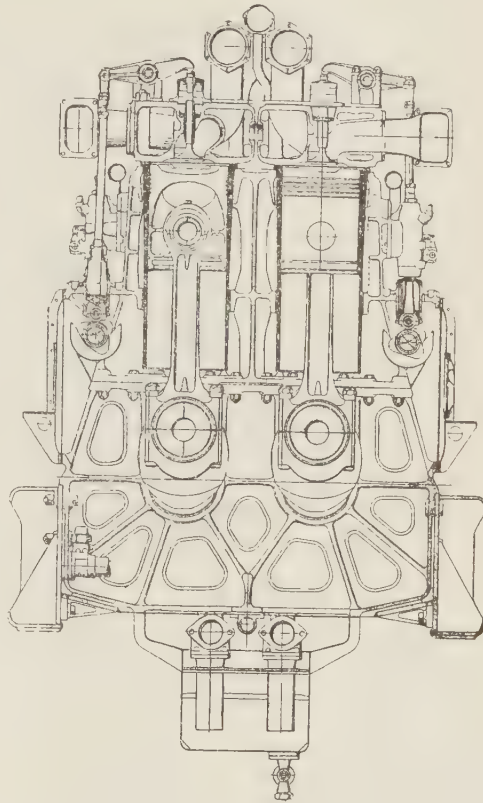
Locomotive 262-BD-1. — Cross section of a diesel engine.
